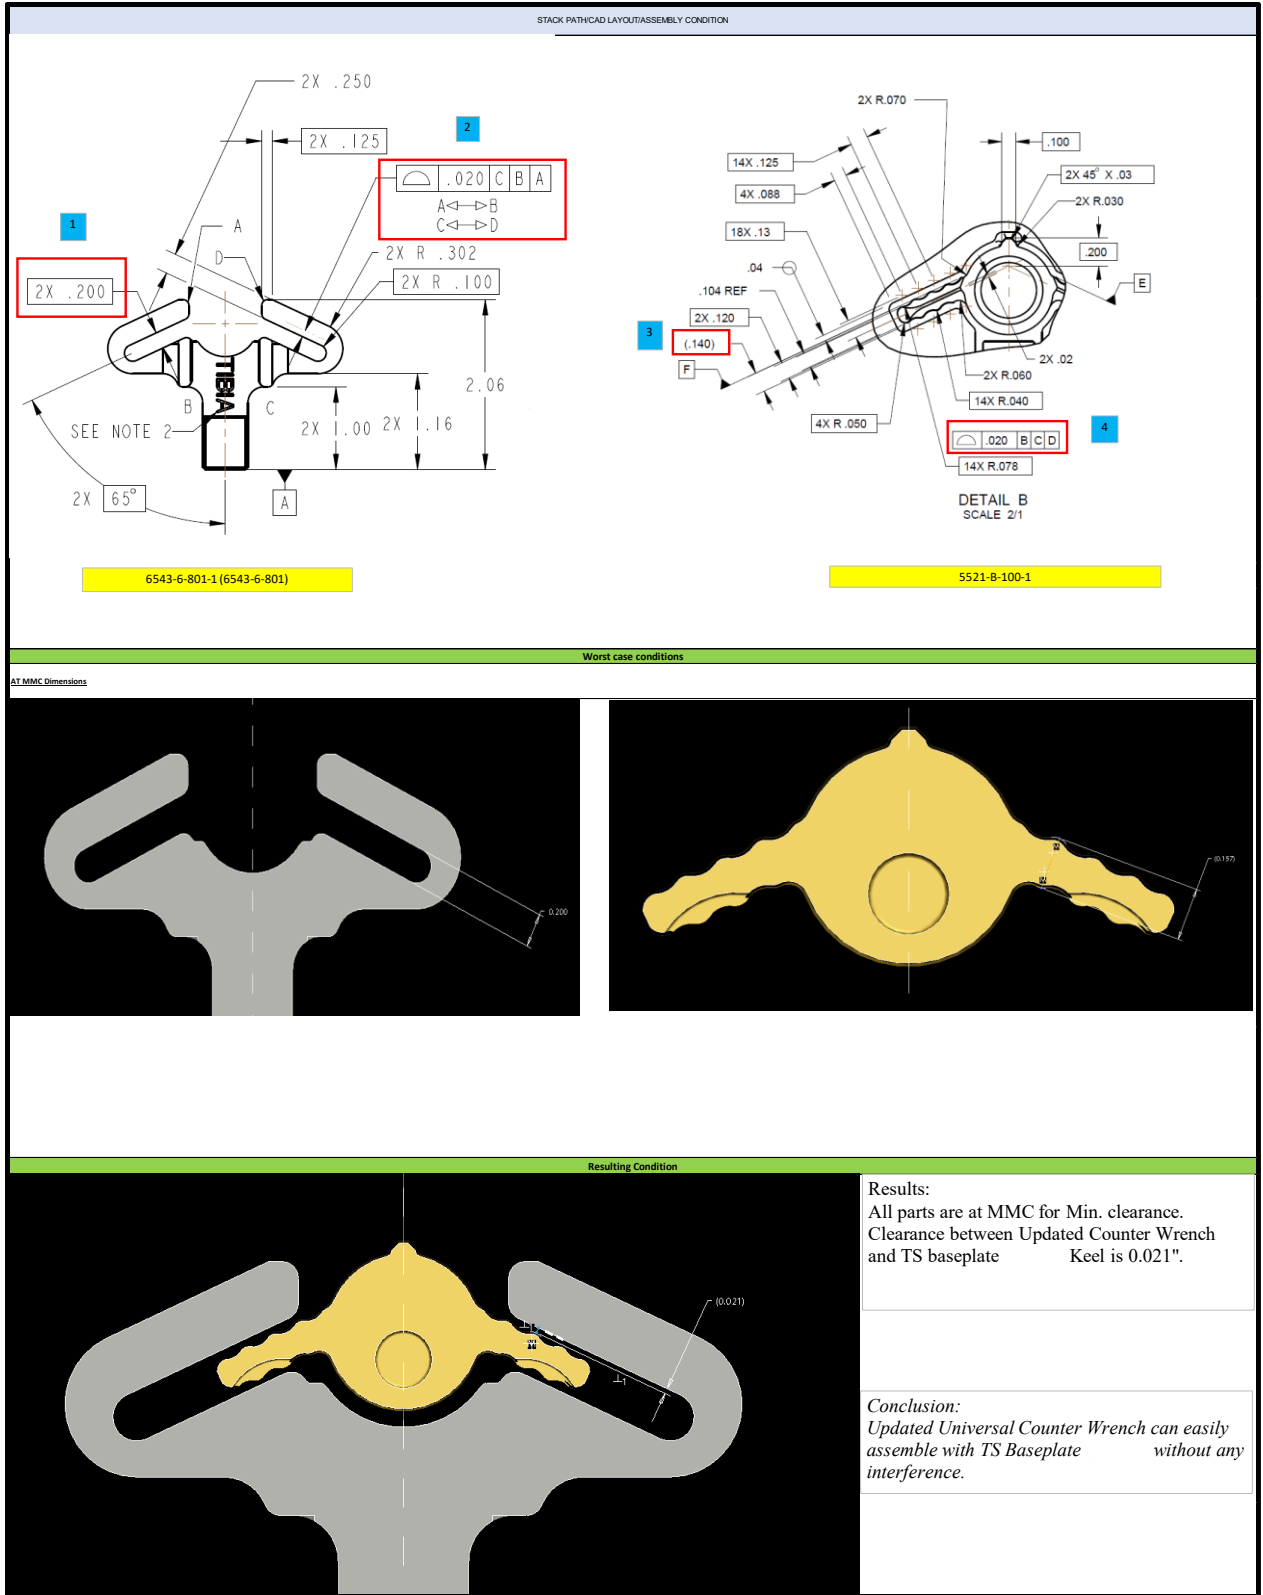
Assembly of Universal Counter Wrench with TS Baseplate size 8 (Tolerance report T02XXX)
